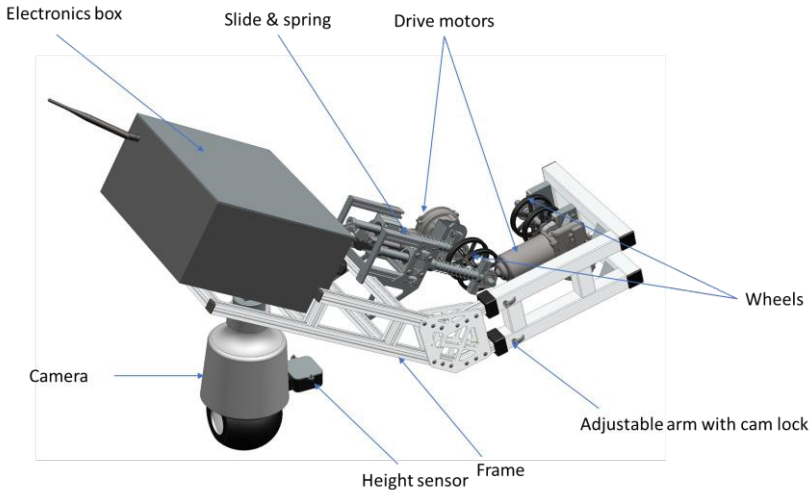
CAD rendering of the proposed robotic platform ARGUS
